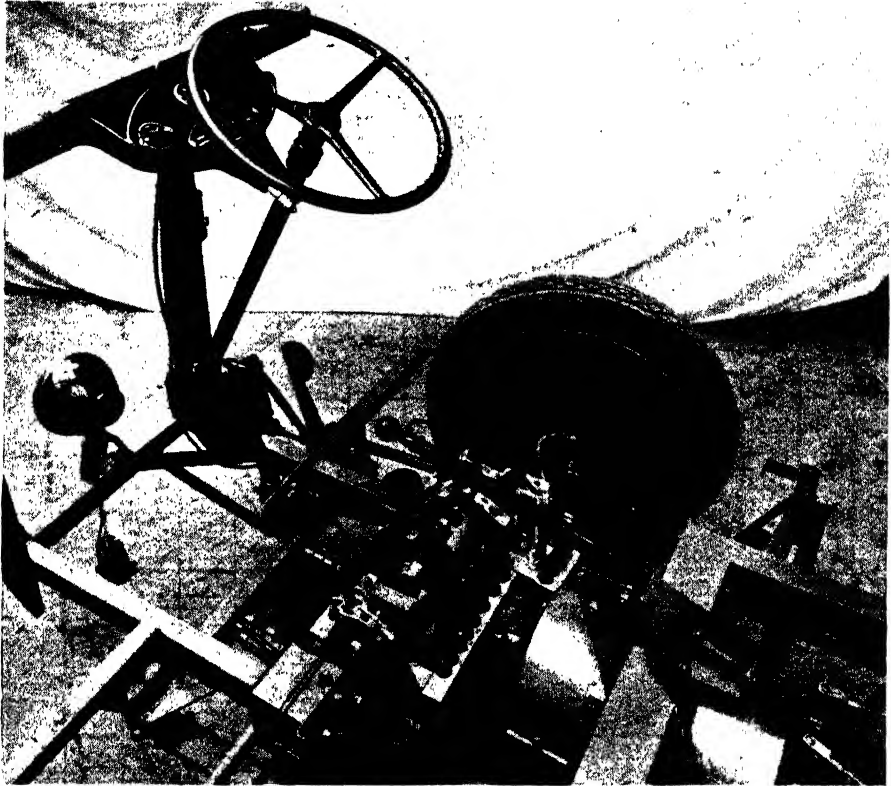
CHASSIS VIEW OF A "METROVICK" ELECTRIC, SHOWING THE CONTROL GEAR
